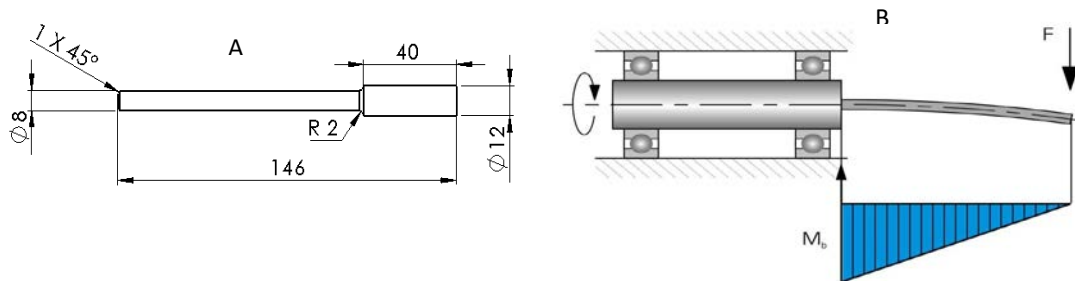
A. Dimensions of fatigue specimens. B. Fatigue test diagram, and maximum bending moment at the fixed section of the workpiece.
